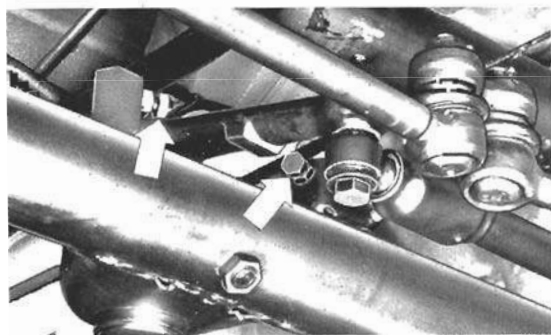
Bolts used to adjust steering lock. On vehicles manufactured before November 1970, steering lock is limited by the position in which the brackets are held to the axle tube.
